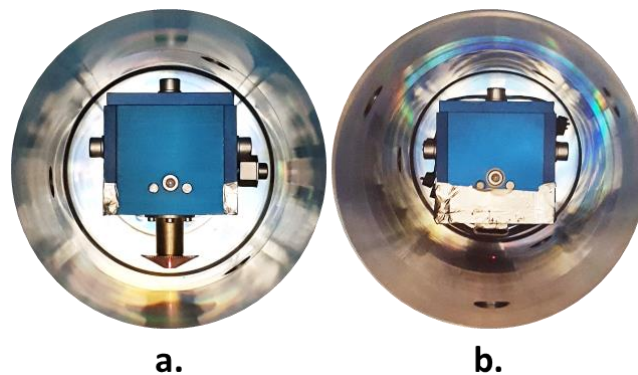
Cutting (a.) and welding (b.) heads shown inside 90 mm ID pipes.
